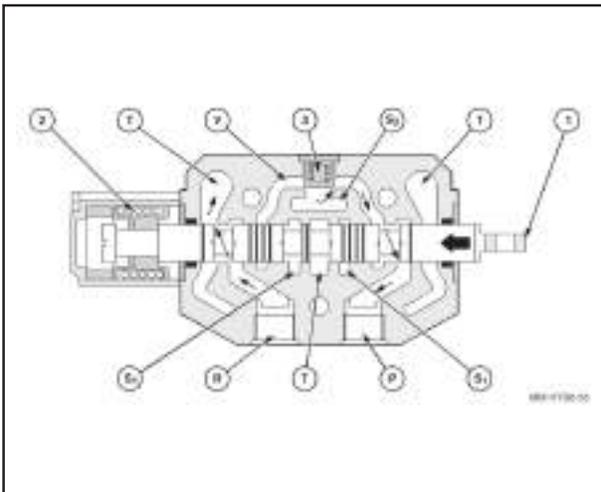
CONTROL VALVE SECTION OIL FLOW - CYLINDER RETRACTING
